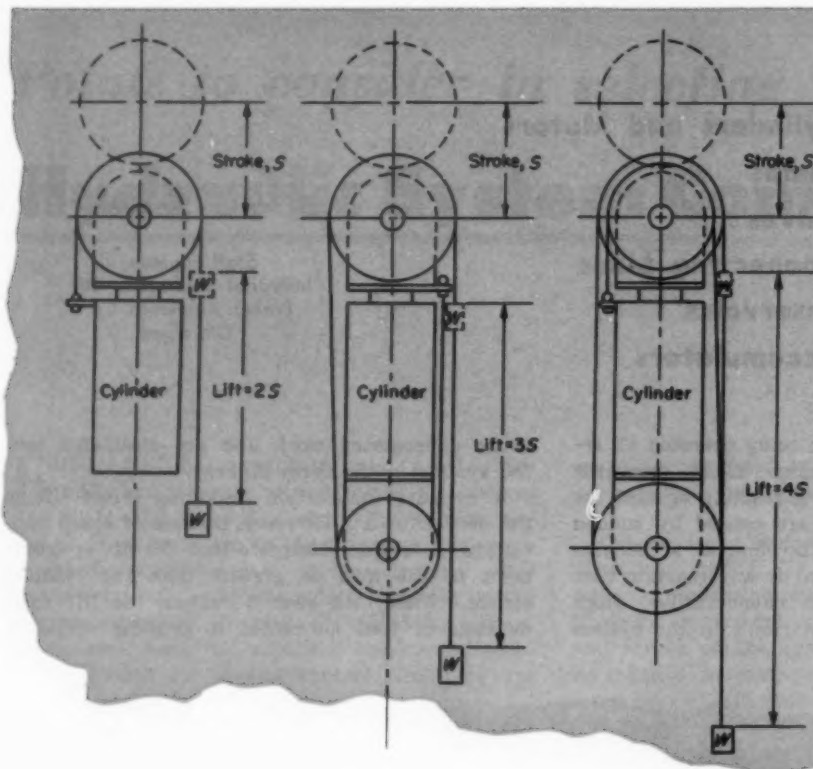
Methods for using cables or chains and sheaves to multiply cylinder stroke
